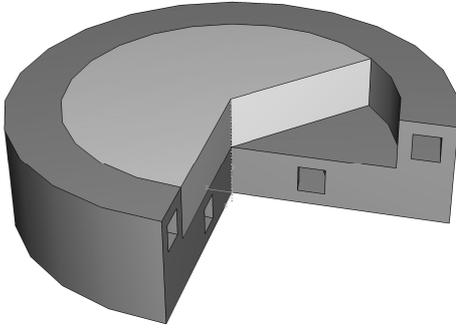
Solid 3-D model of the Steel Mold and Aluminum Cast
